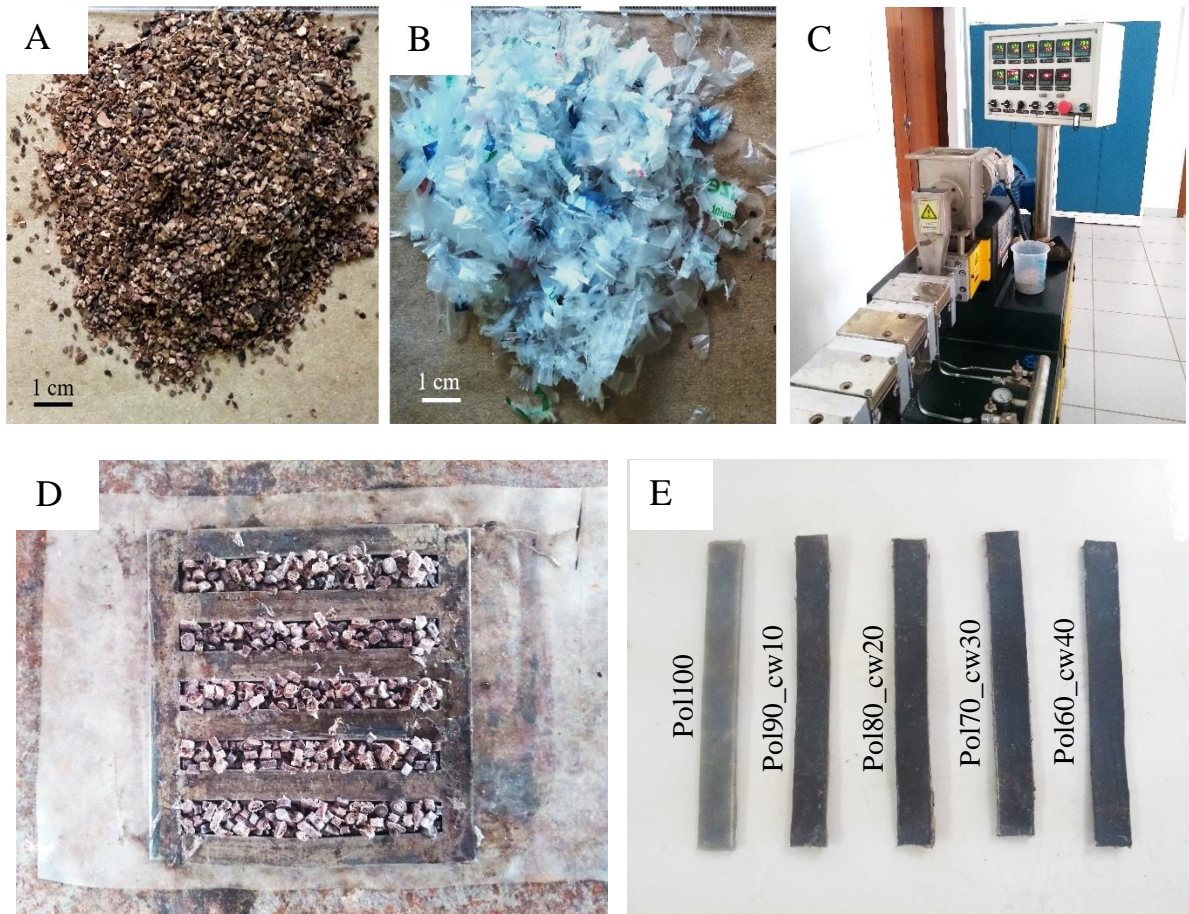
A) Cocoa waste. B) Recycled LDPE. C) Twin-screw extruder. D) Molds for production of the samples filled with extruded pellets. E) Samples demoulded for the physical tests.
